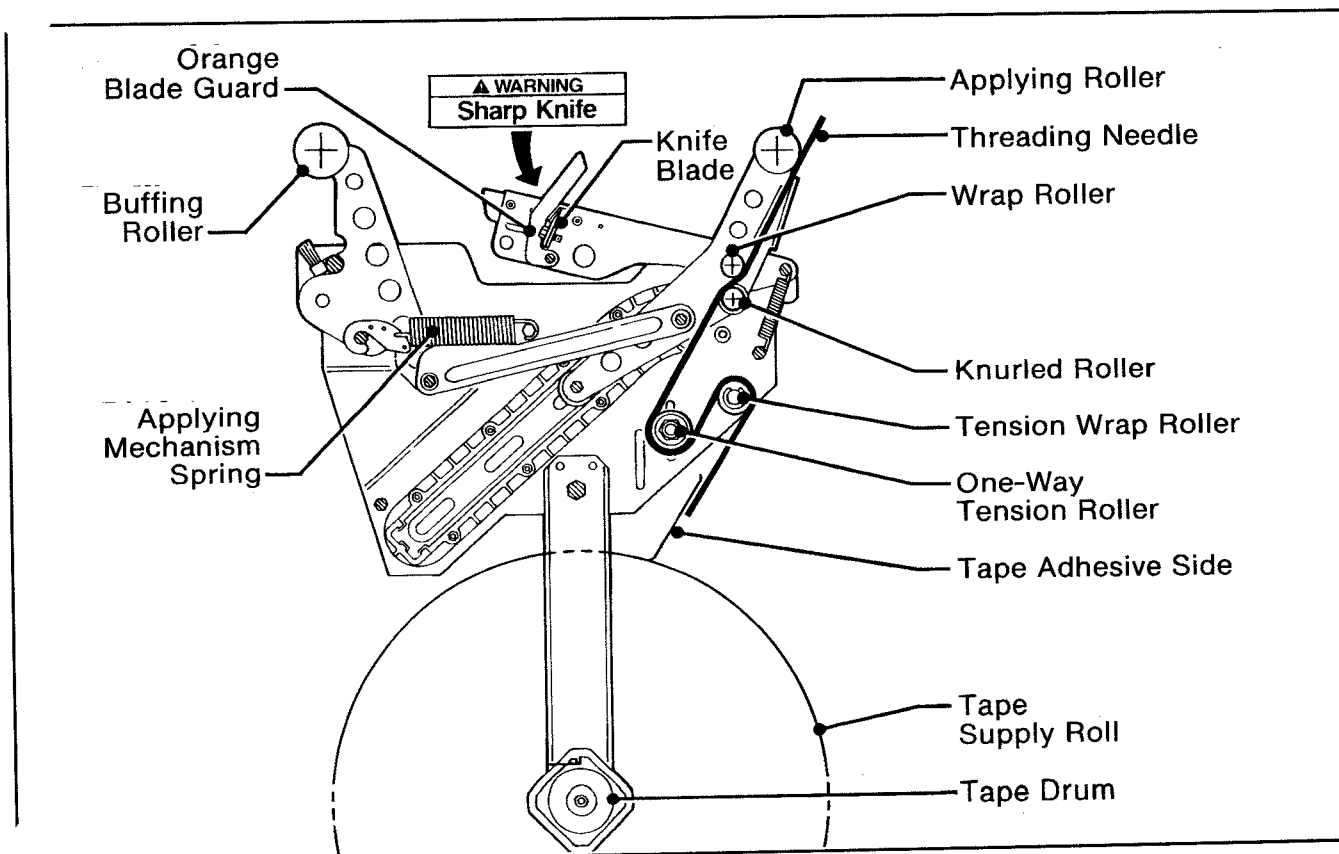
Tape Threading Diagram, Lower Taping Head (Left Side View)
